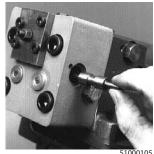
Install Control Pressure Shuttle Spool
